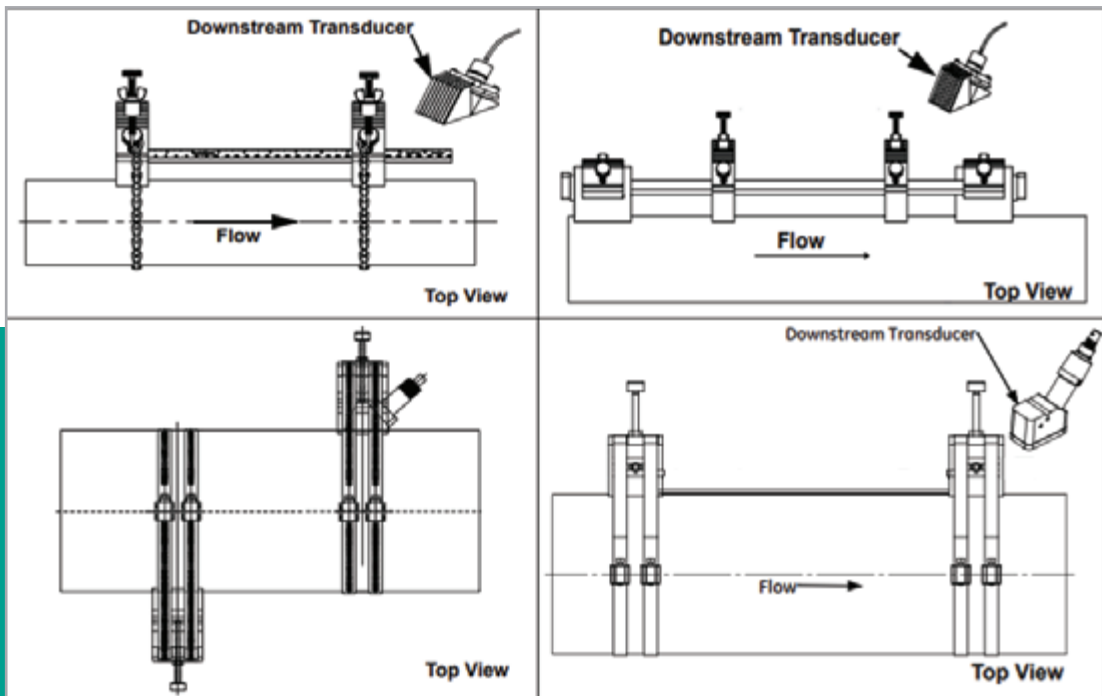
Transducer mounting on UCF (top left), MCF (top right), GCF (bottom left), and SCF (bottom right)
